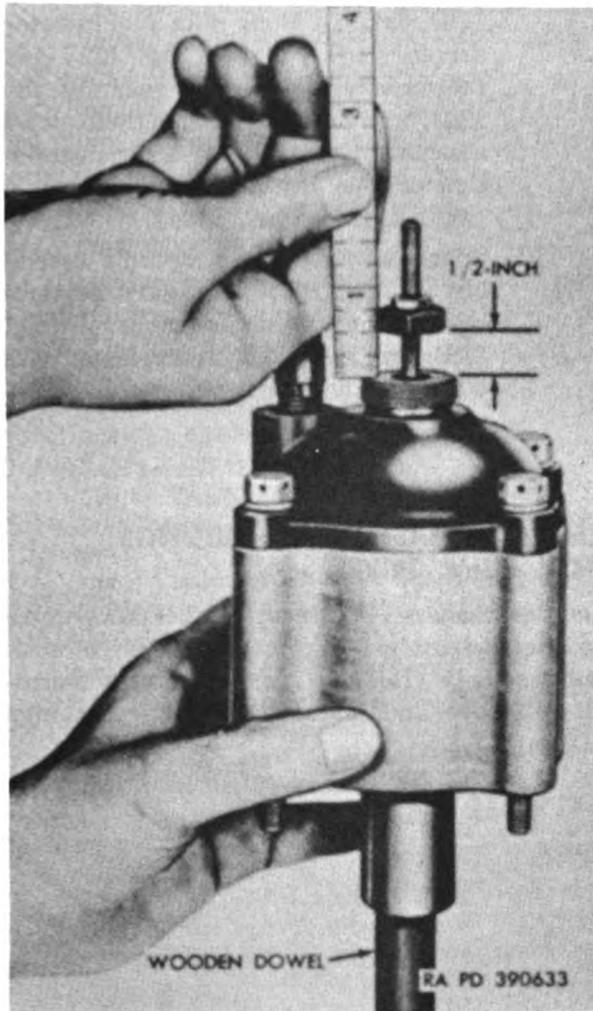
Adjusting length of fuel injector oil booster pump stroke.
